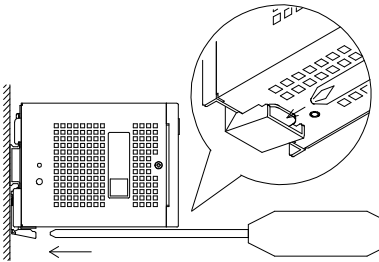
Removing the unit from the DIN rail with phillips-head screw driver < 1 / 3 >
